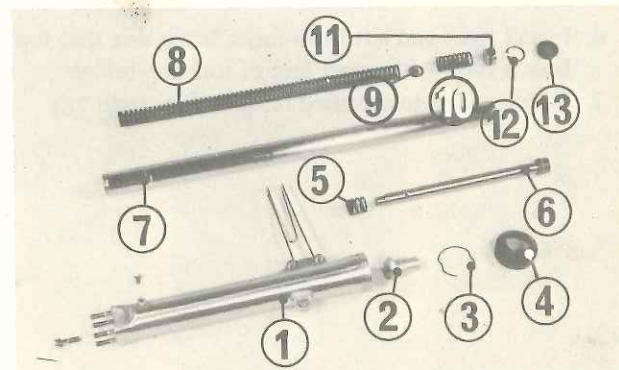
(1) Front fork bottom case (2) Oil lock piece (3) 45 mm snap ring (4) Front fork dust seal (5) Rebound spring (6) Bottom pipe (7) Front fork pipe (8) Cushion spring B (9) 16 mm washer (10) Cushion spring A (11) Upper seat (12) 30 mm circlip (13) Top cap
